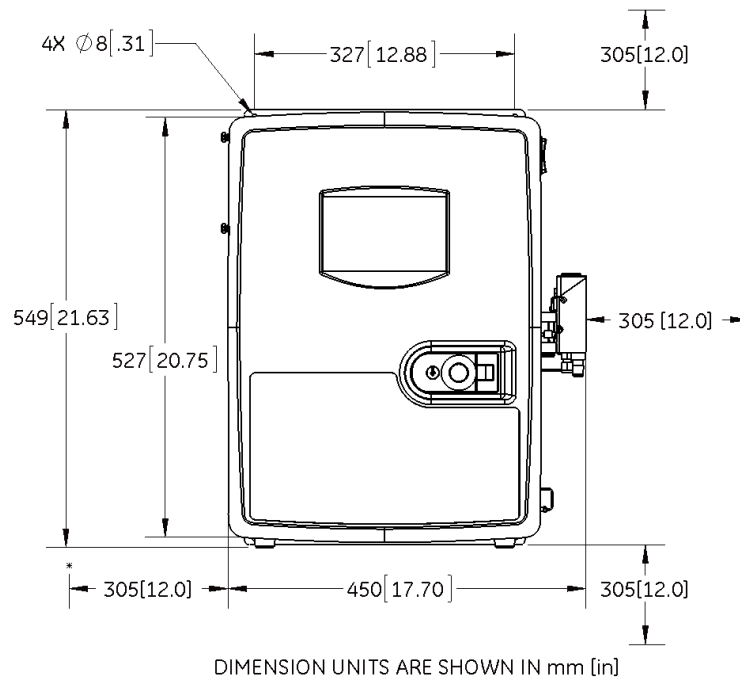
Required Installation Clearances — On-Line TOC Analyzer (Front View)
